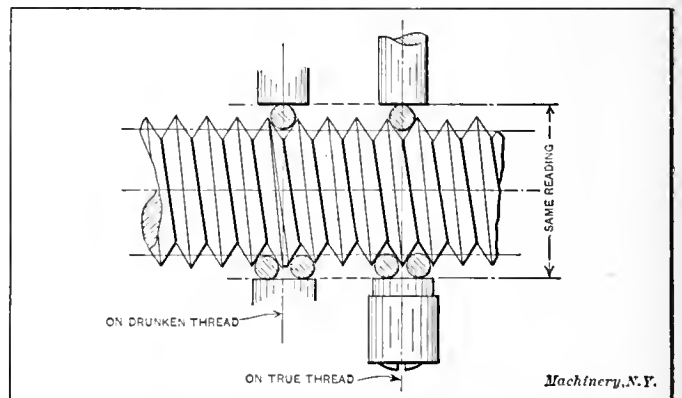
The Three-wire Method of Thread Measurement makes no Distinction between True and Drunken Threads
